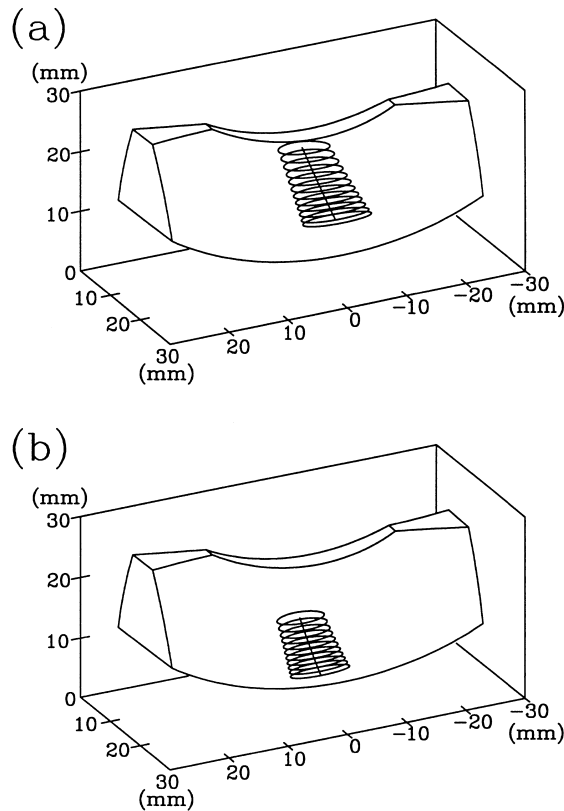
Bearing contacts and contact paths of the ZN-type worm gear set under different center-distance offset assemblies.
